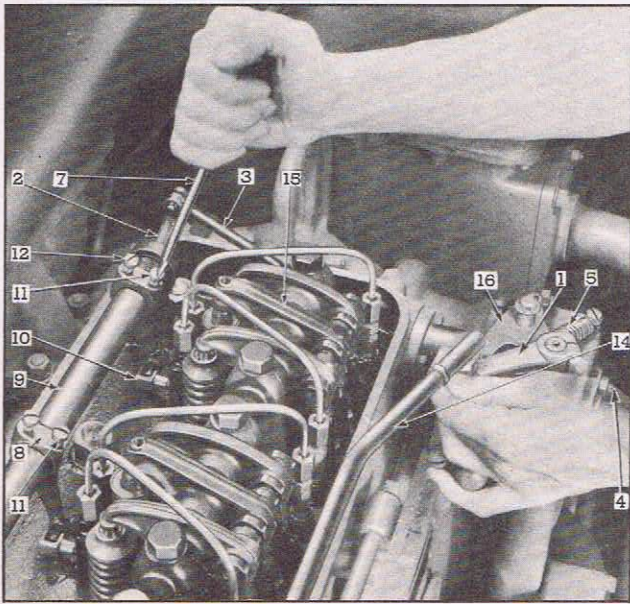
POSITIONING RACK OF NO. 1 INJECTOR ON ENGINE EQUIPPED WITH LIMITING SPEED TYPE GOVERNOR.
